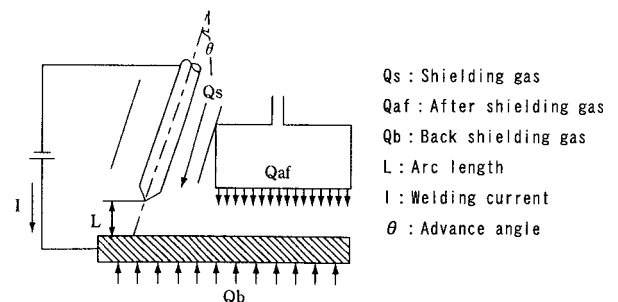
Schematic diagram of TIG arc welding device of titanium
